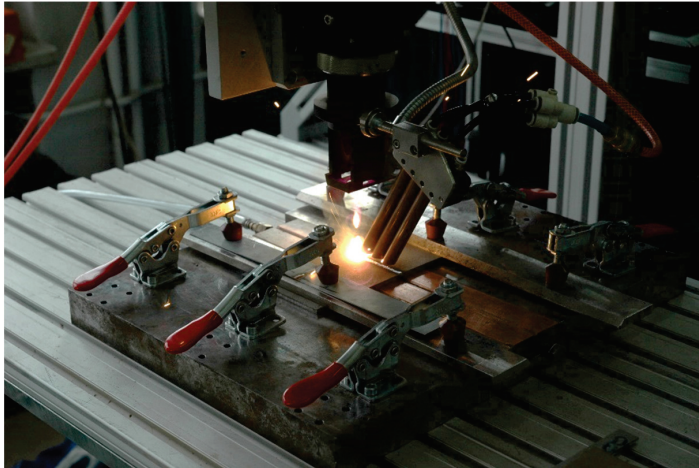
The autogenous laser welding of butt joints of ArmoX 500T steel samples.
